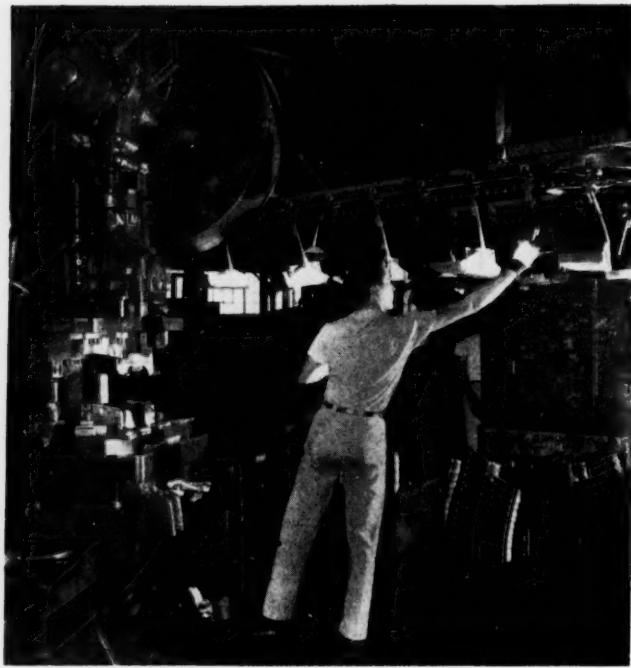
After parting and trimming, the two components are placed in the color-coded conveyor buckets for delivery to the fabrication department.
